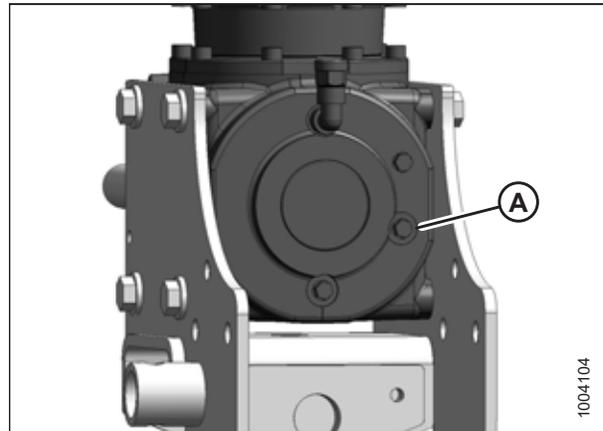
Header Swivel or Hitch Swivel Gearbox Check Plug
